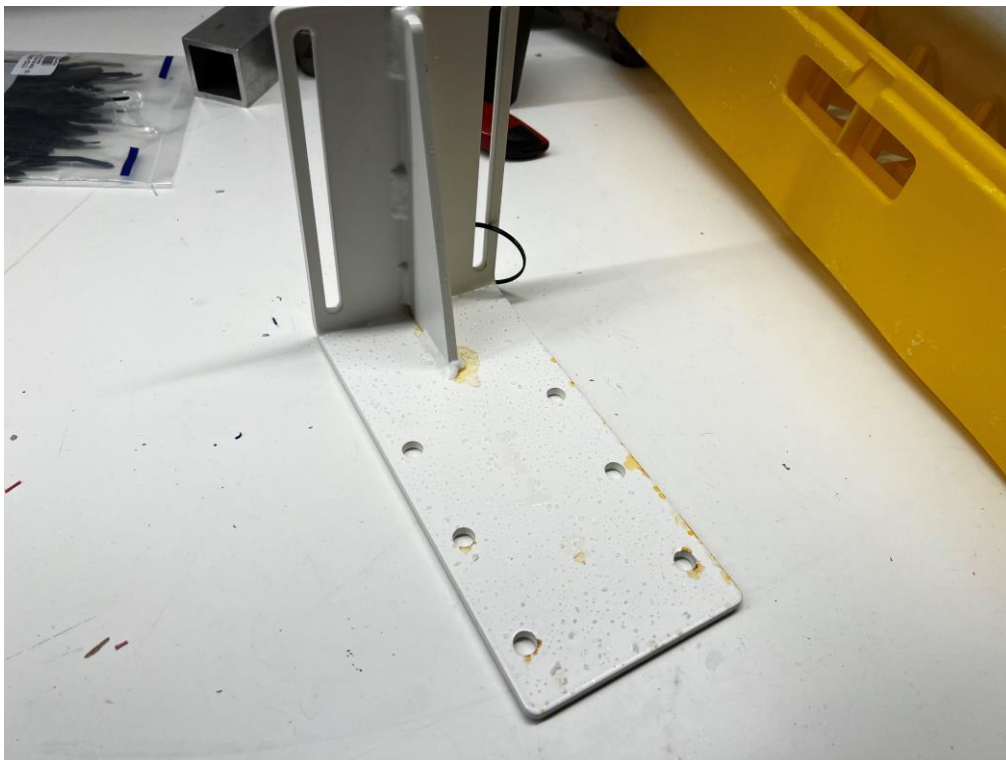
Visual inspection. (Wood/concrete mount P/N: 20032) slight coloration on repaired cracks, and corrosion on edges and crevice from missing welding.
